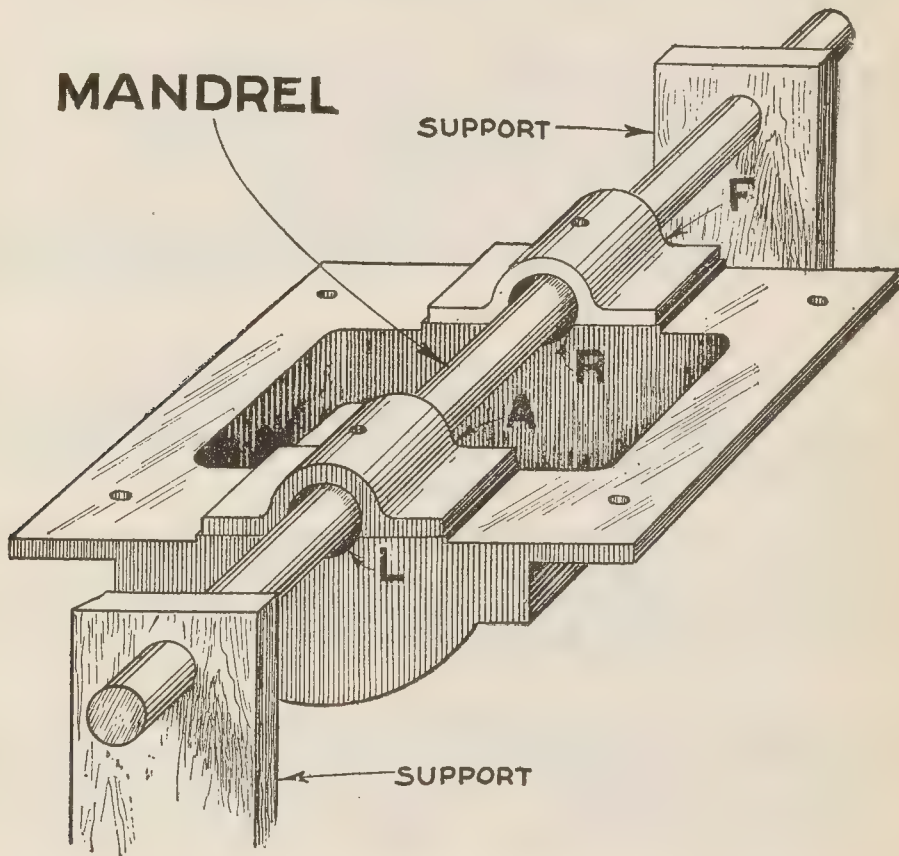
,399—Babbitting engine main bearings; view showing mandrel in place ready for pouring. The ends L,A,R,F, of the bearings are closed by putting on close fitting wood blocks so that the molten metal will not run out.
